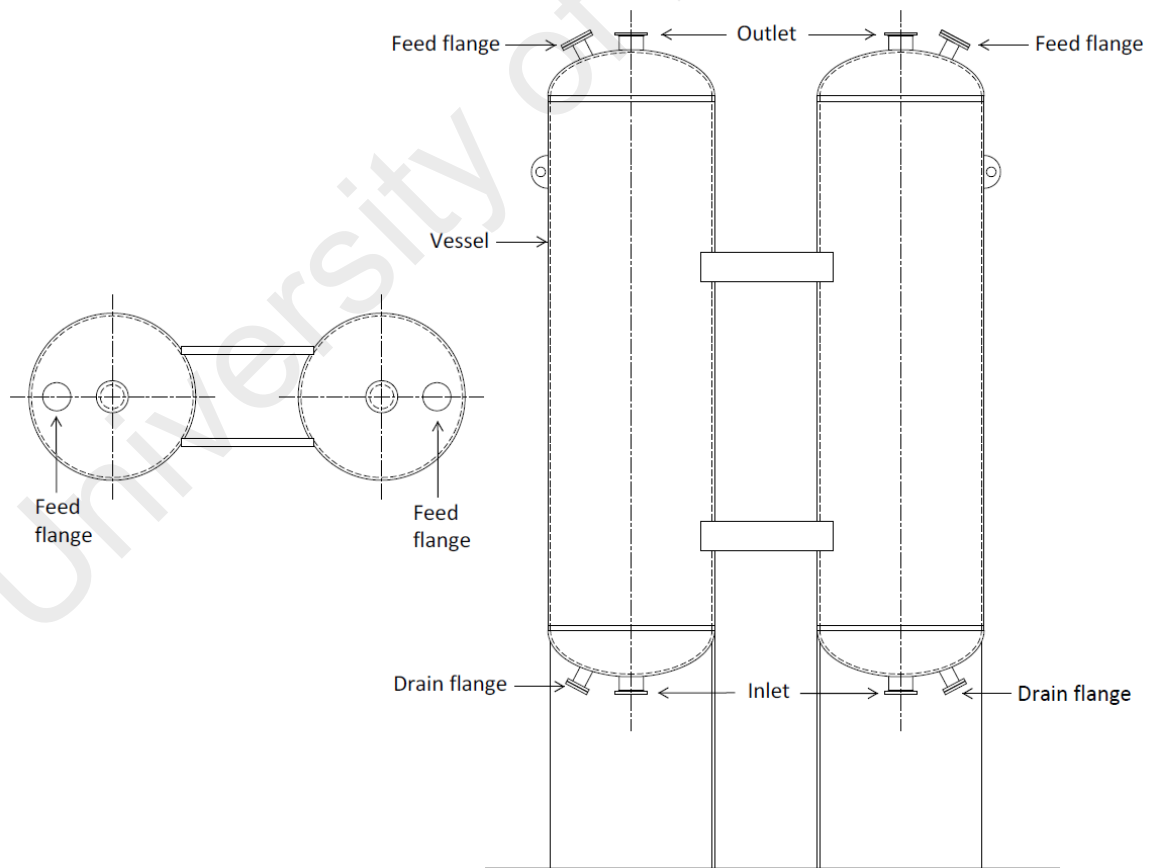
Typical 2D sketch of a filling medium type vessel: plan view (left) and side view (right)
